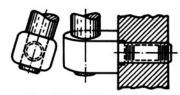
Wrong method of fastening steel lug, requiring cut and try. End view shows results.
